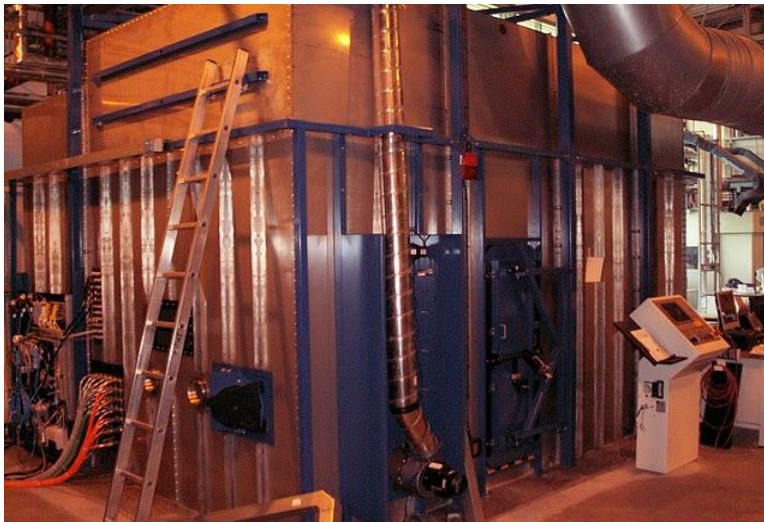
TRUMPF VFA 600 used in the present study. The instrument consists of the laser head and the nozzle attached to a CNC head enclosed in the chamber and the controller unit with the peripheral hardware for producing the deposition program and tool path.
